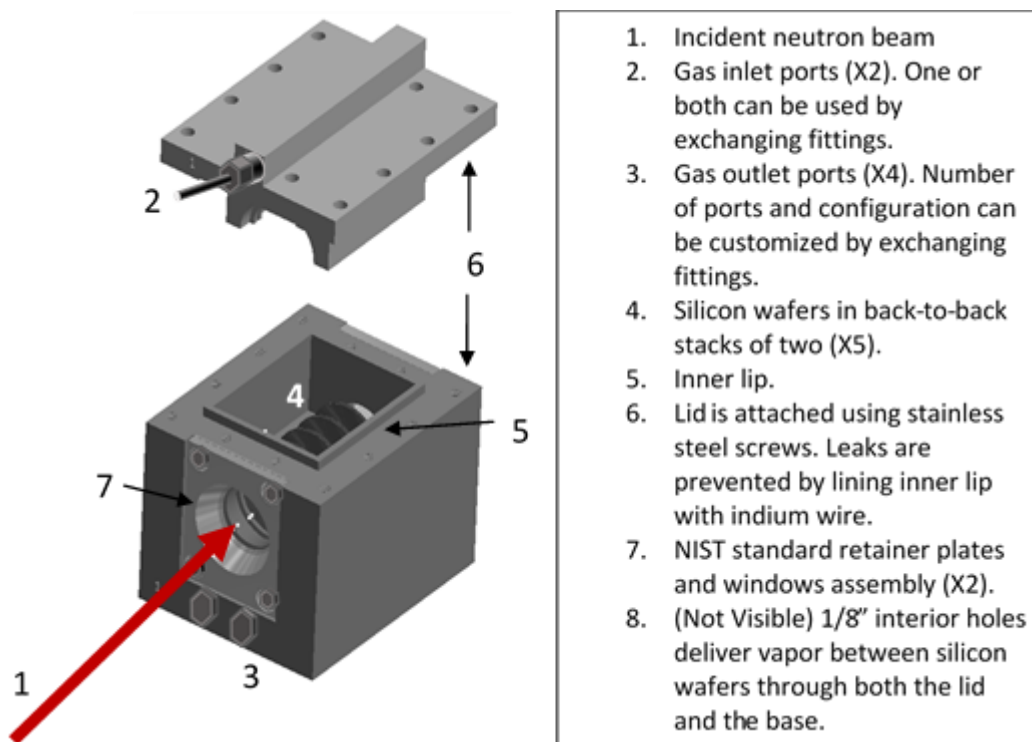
Custom sample holder for SANS swelling experiments. Inlet and outlet ports continue through the cell and can be customized by attaching various plugs or tube fittings. Retaining plates, windows, and screws were provided by NIST.
